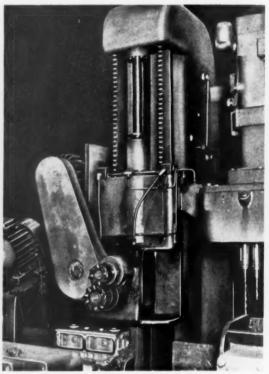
Milling head for machining the tappet cover face and the petrol pump facing on the machine shown in Fig. 2
